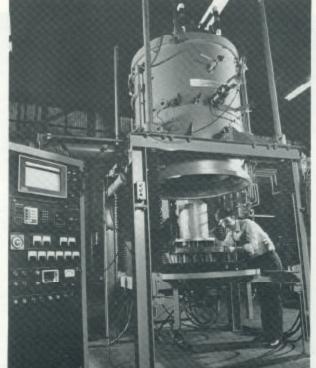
Vertical elevator type sinter furnace for silicon carbide
